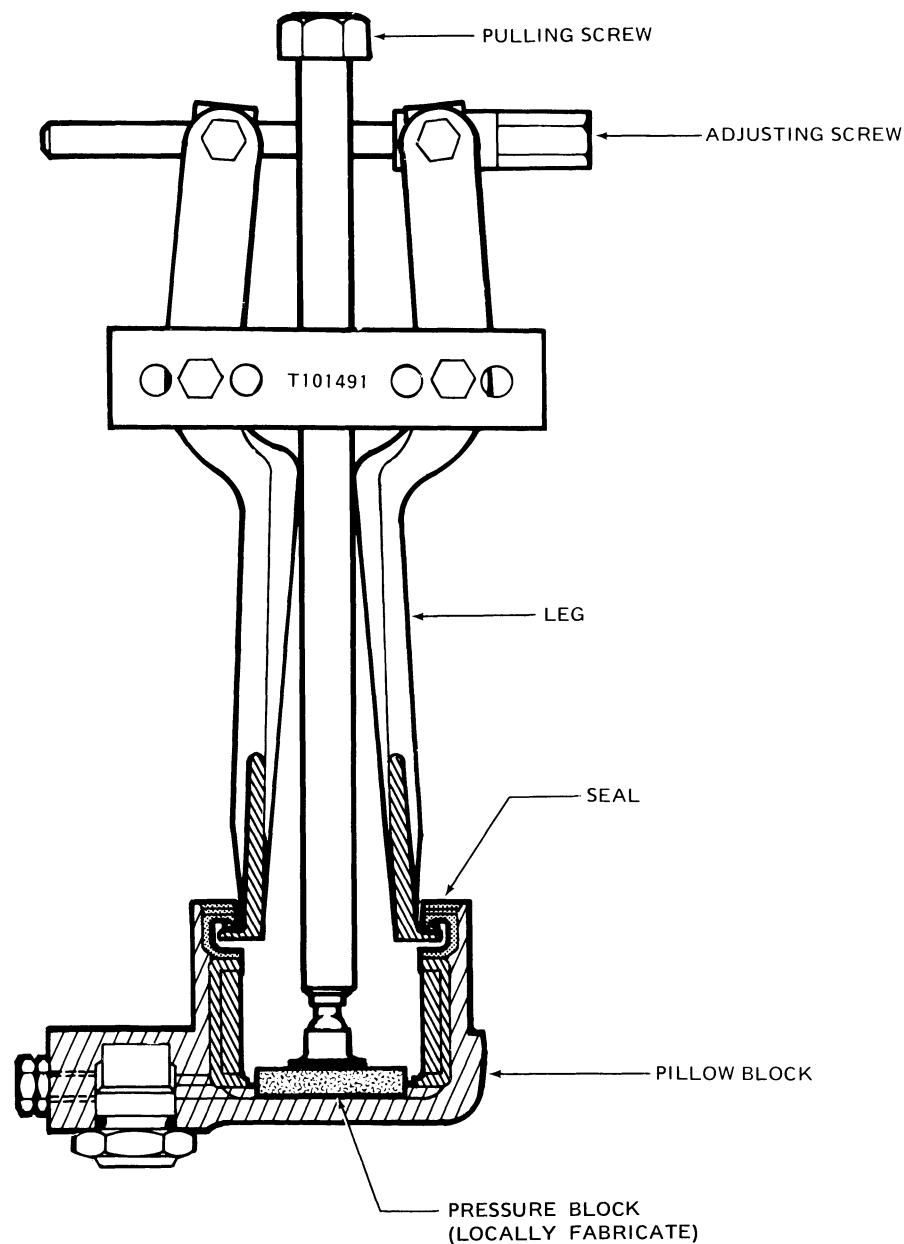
Trunnion Bearing Inner Race Removal – Tool Application
